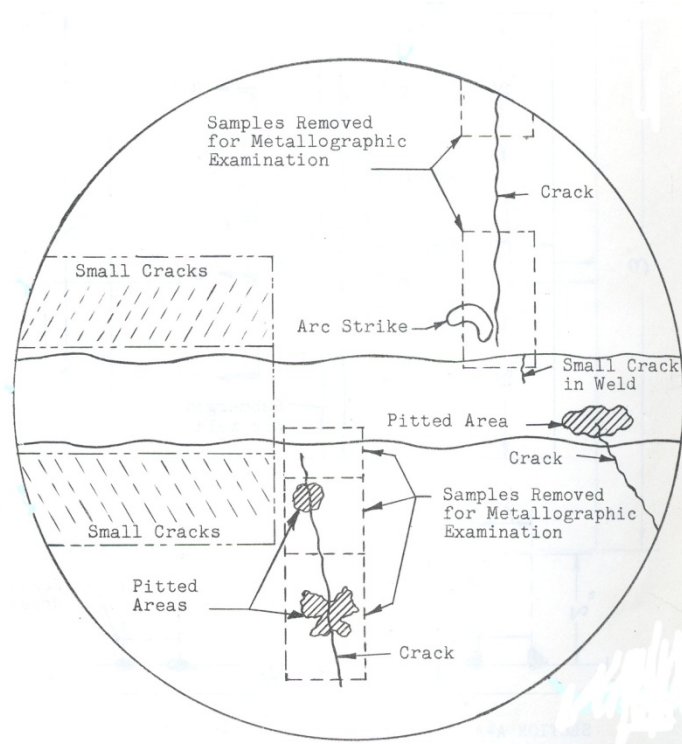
Drawing of interior surface of sample removed from Tank 16H.
